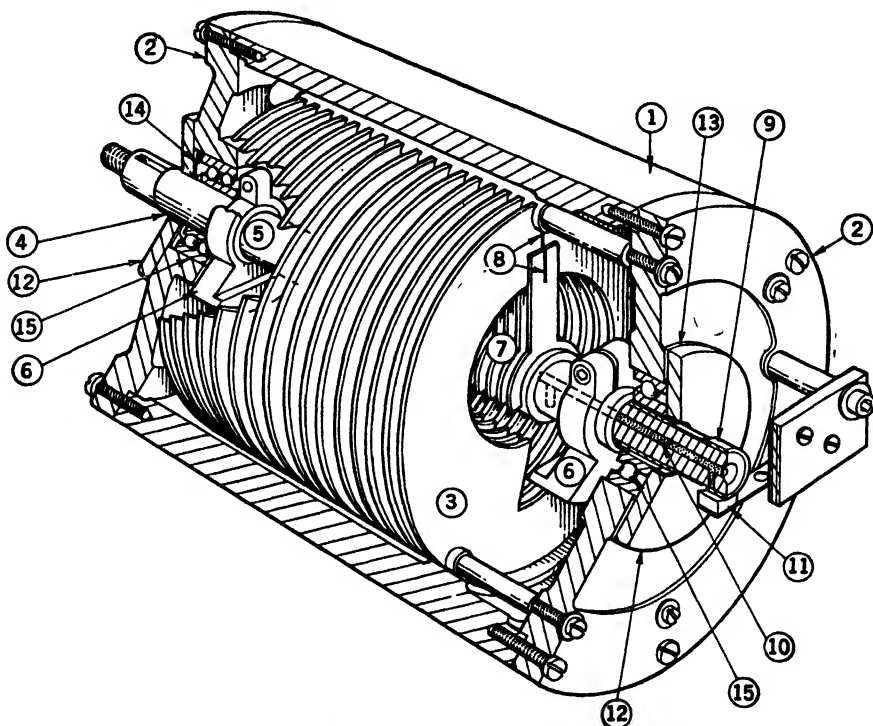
Rauland CV-11 sweep condenser: (1) housing; (2) end plates; (3) stator plate assembly; (4) stub steel driving shaft; (5) ceramic main shaft; (6) counterweights; (7) rotor plate assembly; (8) index marks for zeroing rotor; (9) slip ring; (10) solder connection from slip ring to stator plates; (11) brush; (12) bearing retainer plates; (13) shims for longitudinal rotor position adjustment; (14) loading spring; (15) ball bearings.
